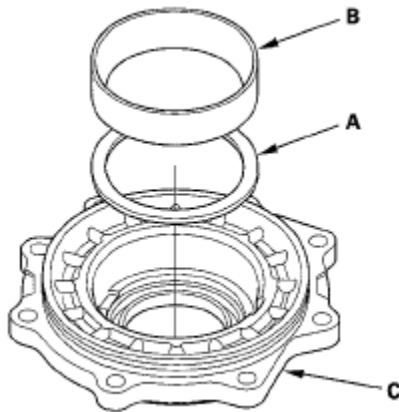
Identifying Bearing Outer Race, Transfer Cover And Thrust Shim
